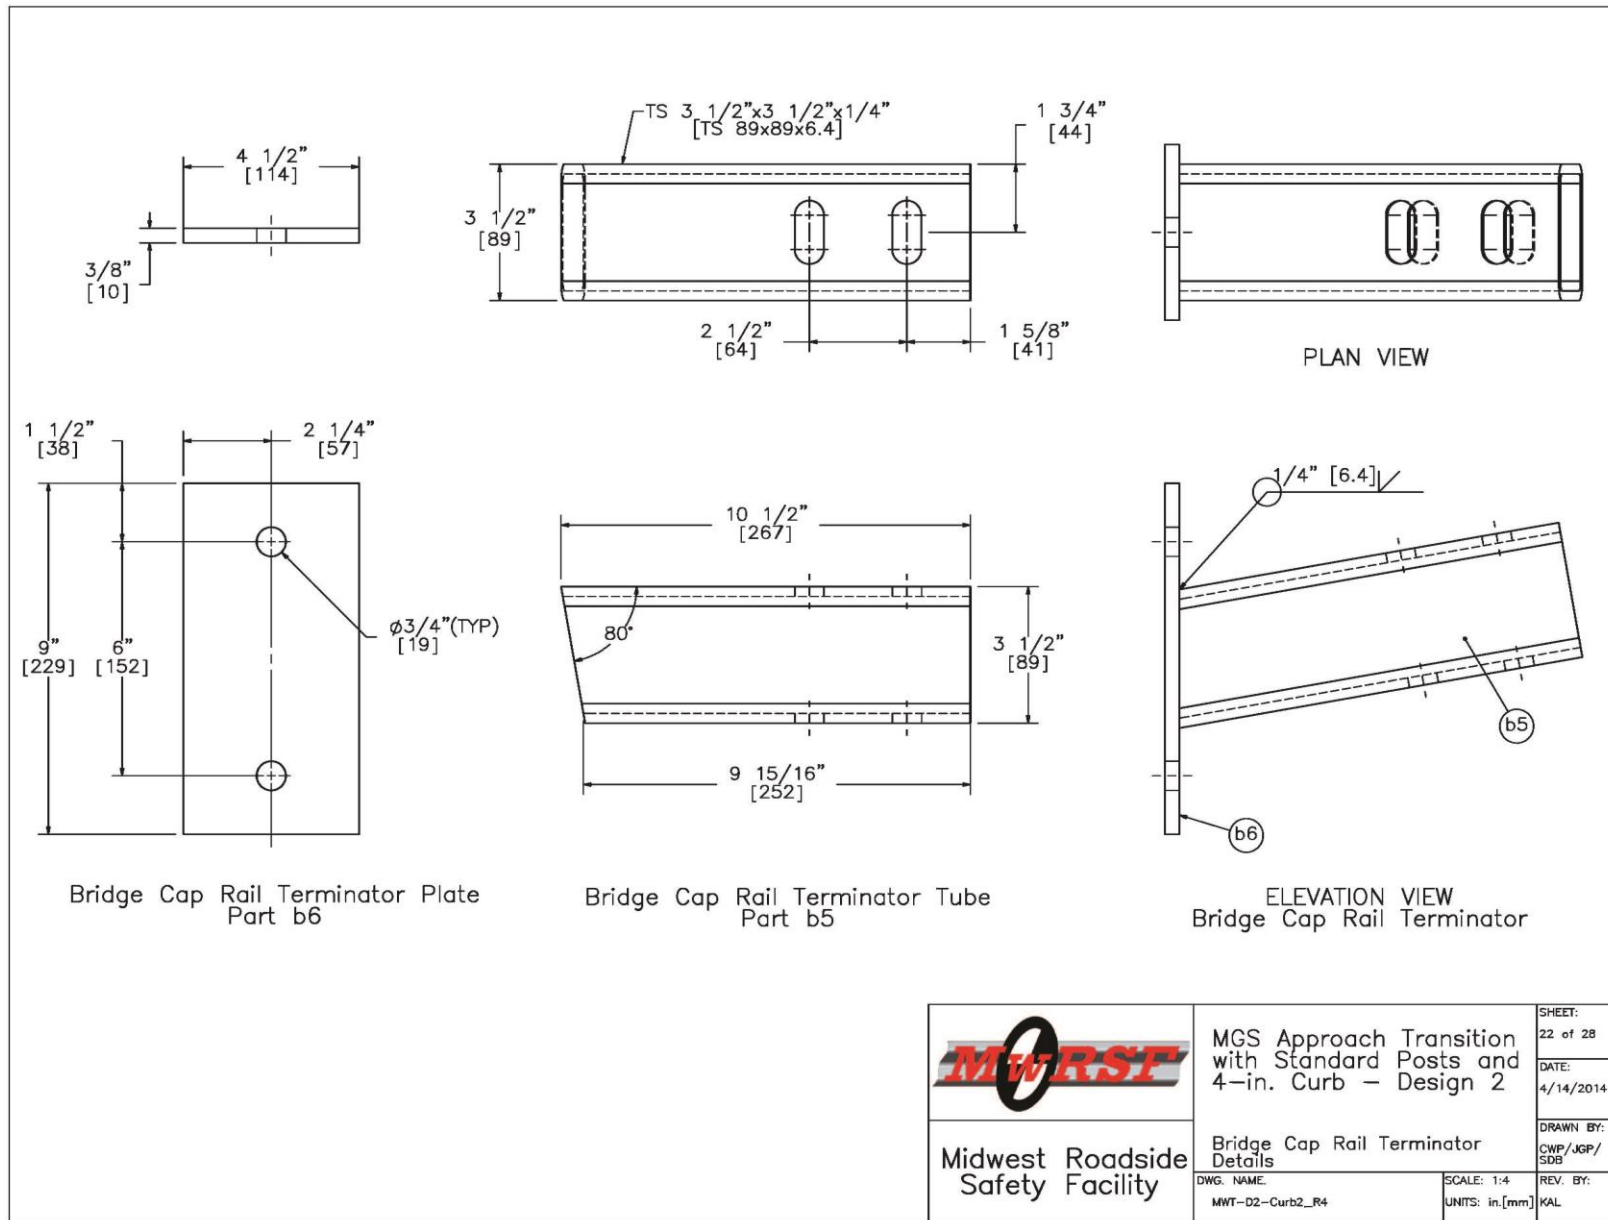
Bridge Cap Rail Terminator Details, Test Nos. MWTC-2 and MWTC-3
